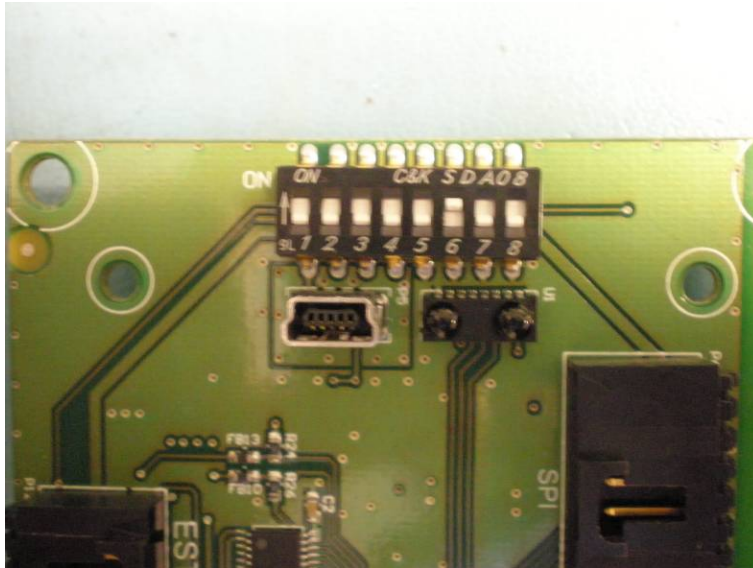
Dip switch block as viewed on the bottom of the CHTX CPU board
